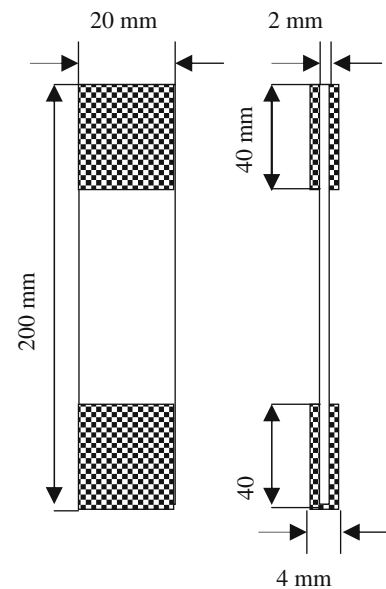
Geometry and dimensions of the specimens tested in the longitudinal tensile and fatigue tests
